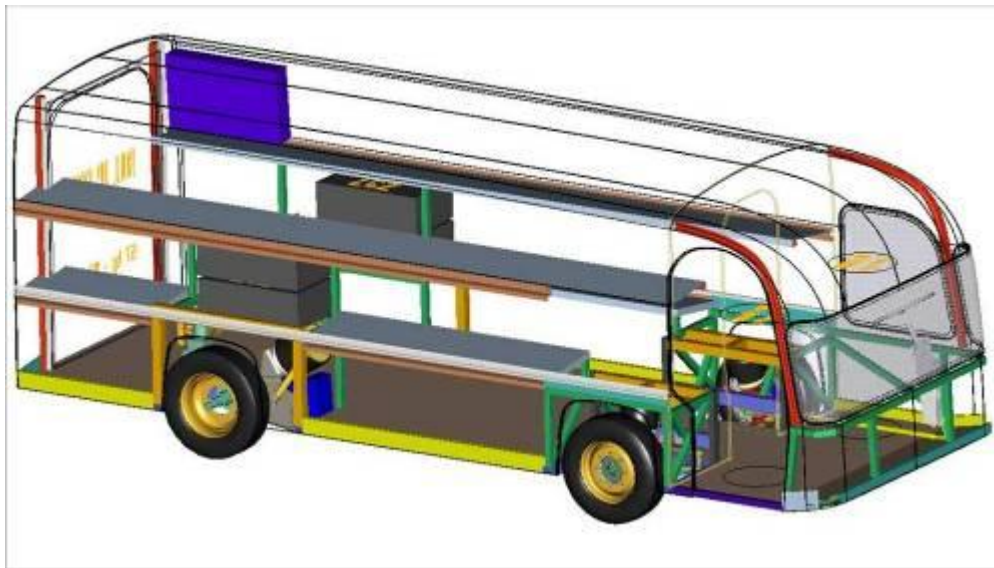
Initial CAD Model of the QuickSider™ Preliminary Design
